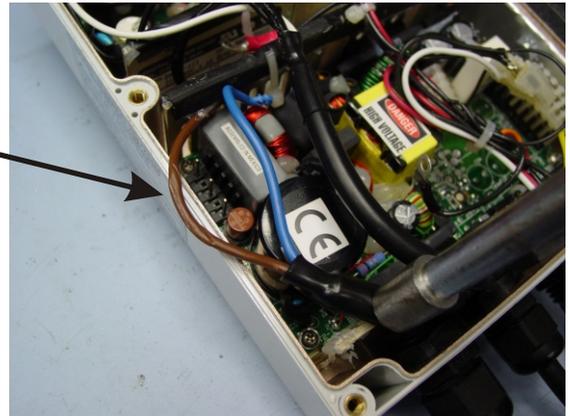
Example of wire in Figure 1 crimped when cover is screwed down to 5 to 8 inch pounds of torque (per Impact assembly procedures).
